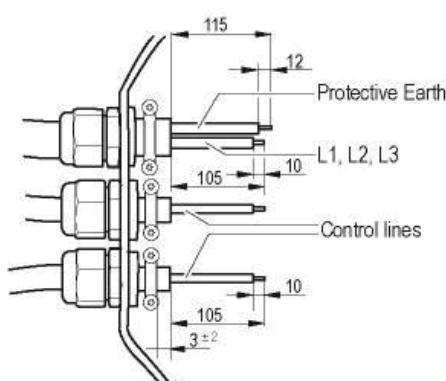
Recommended stripped lengths in mm (inside terminal box) for unshielded cables. In this illustration, all cable glands are used by way of example. The illustration may differ from the actual device design.
